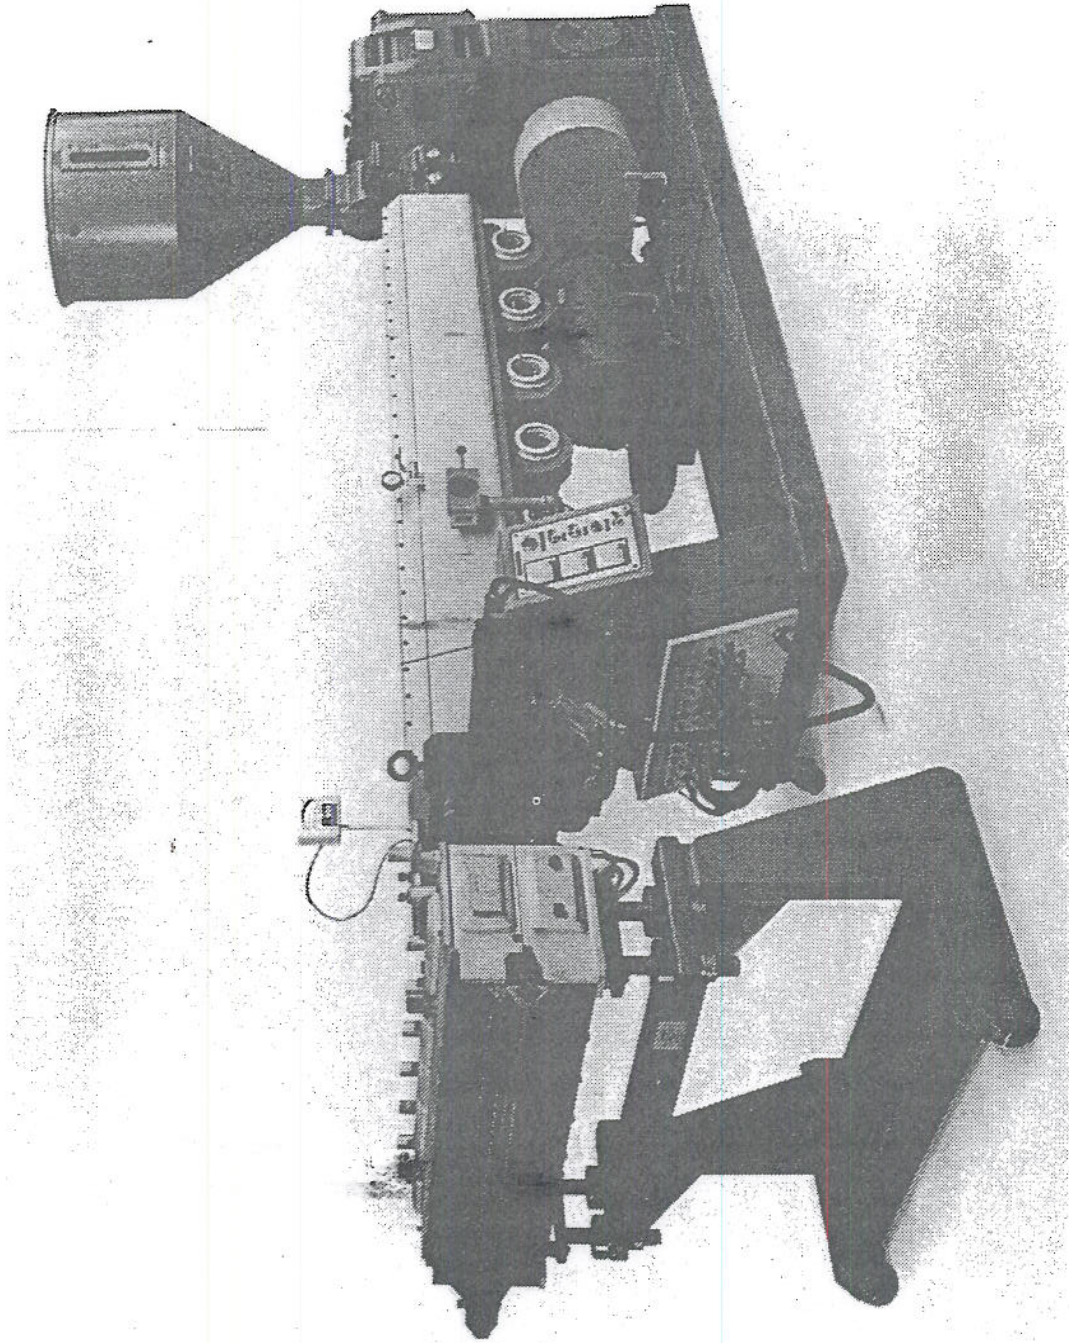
• Sheet die with single screw extruder (90 mm or 3.5 in.) [OMIPA]
